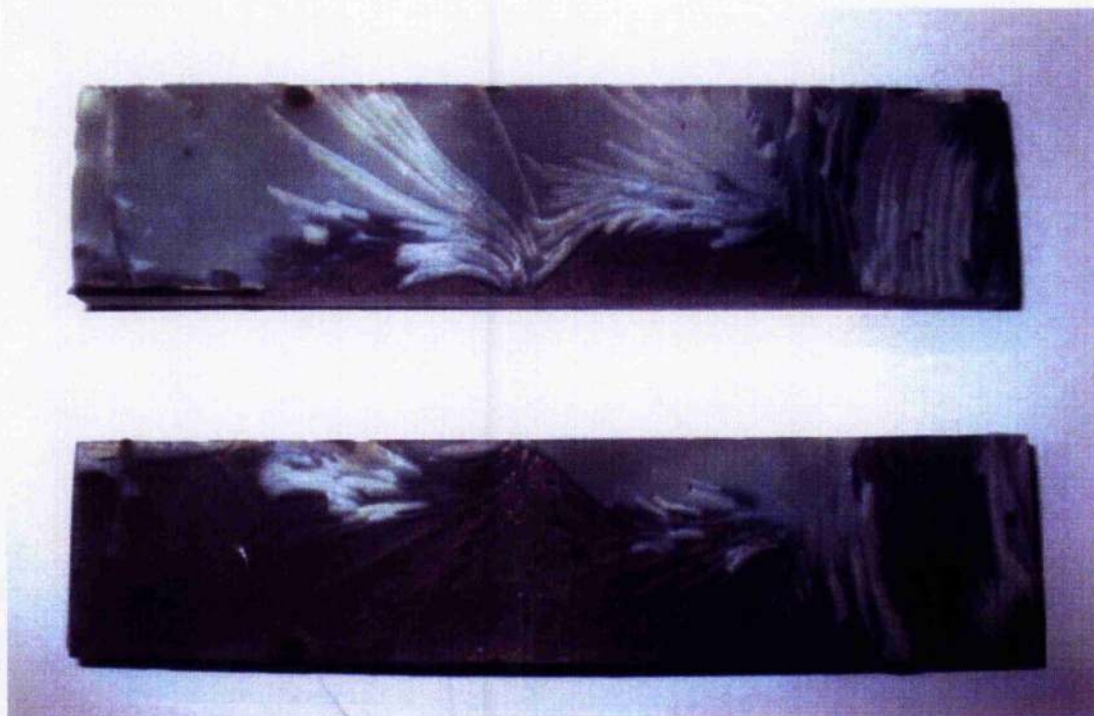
Fractured surfaces of standard steel/steel 150mm flat beam specimens.
